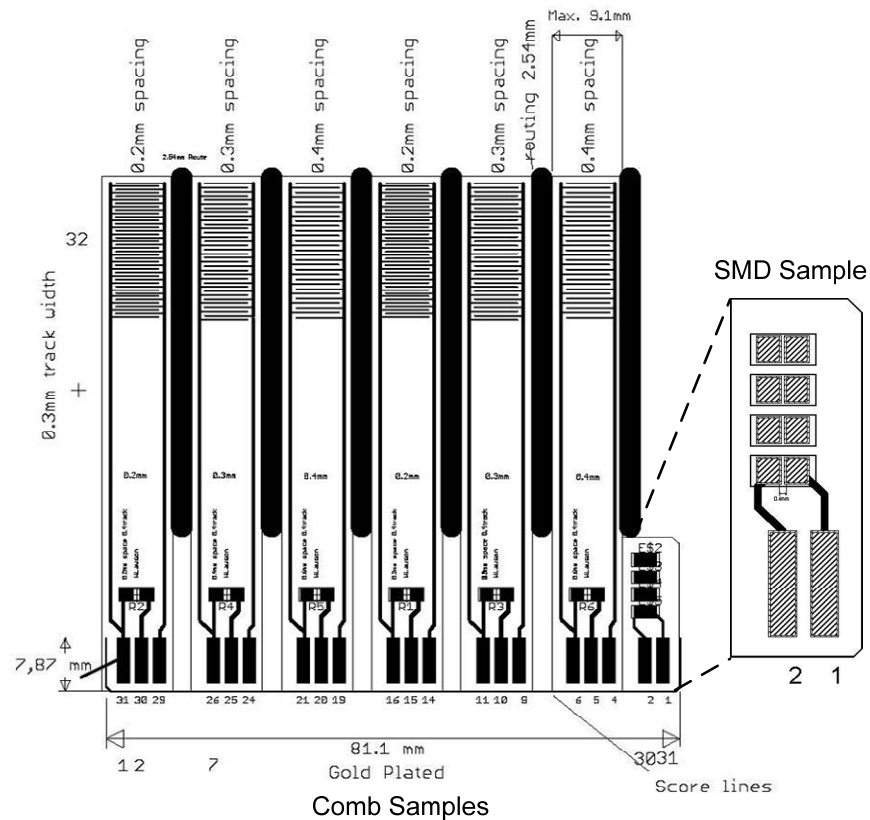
Left, PCB Design. Right, Magnified View of SMD Sample
